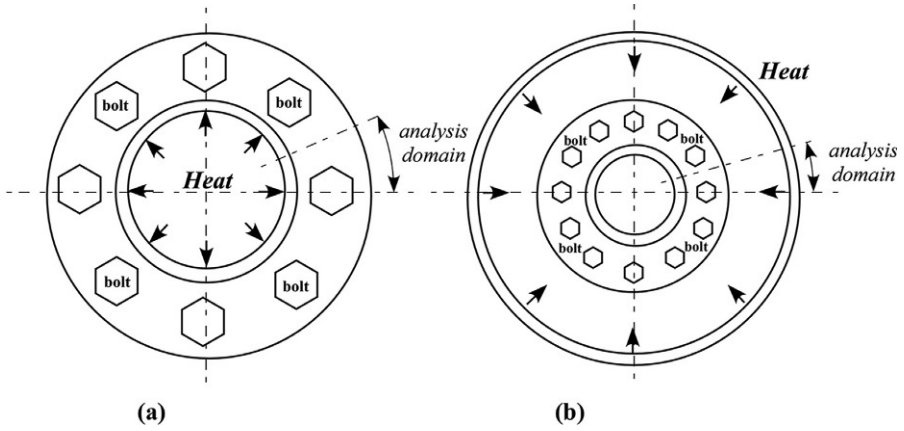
Heat flow pattern in actual bolted joints under thermal load. (A) Pipe flange and (B) disk brake.
